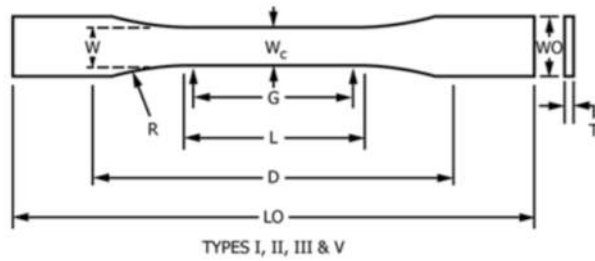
Dog-bone specimen dimension (ASTM D638).
